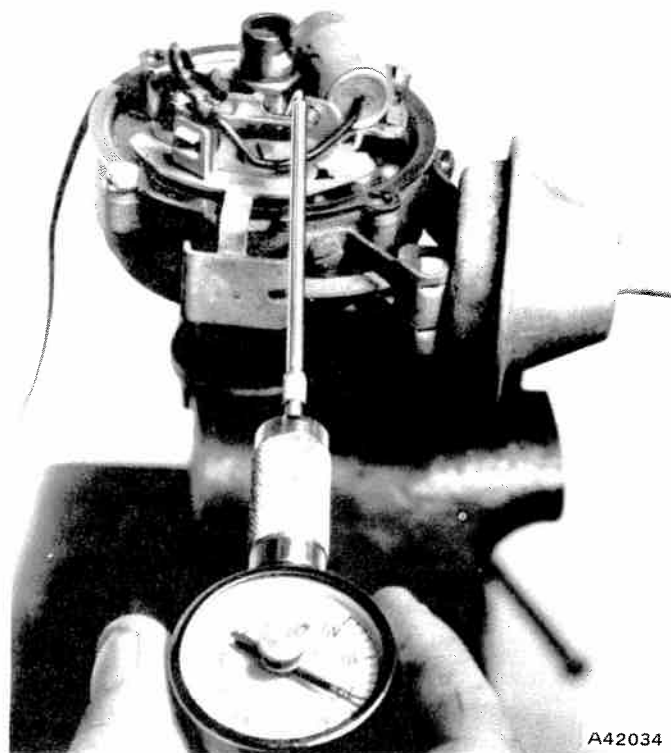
A-44 Breaker Arm Spring Tension - Six-Cylinder Shown
